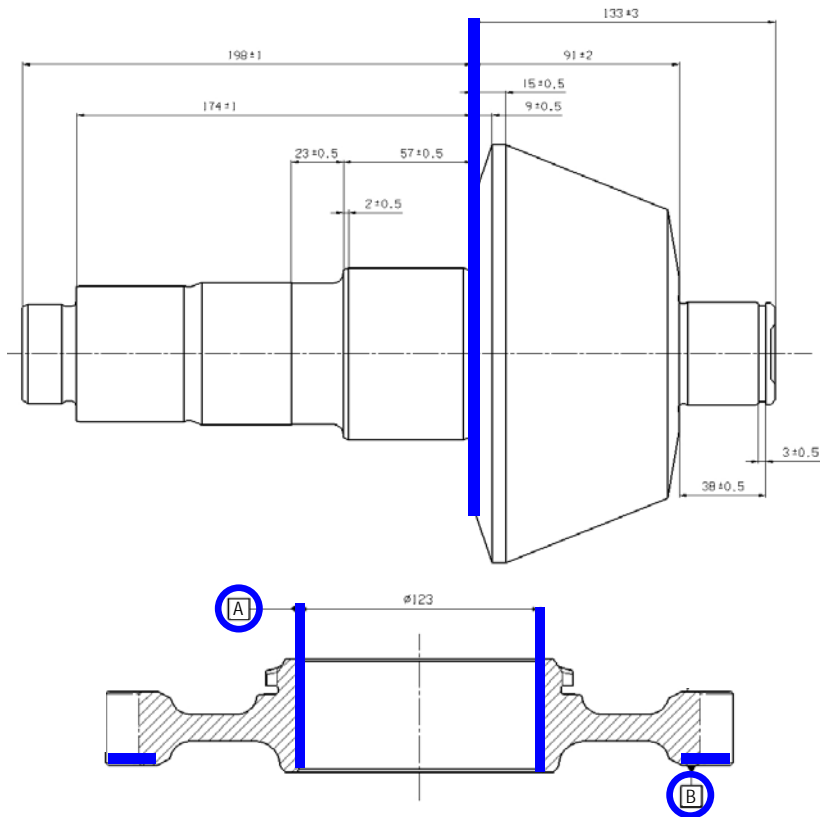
Identified design datums are marked on a pinion (above) and gearwheel drawing (below) respectively.
